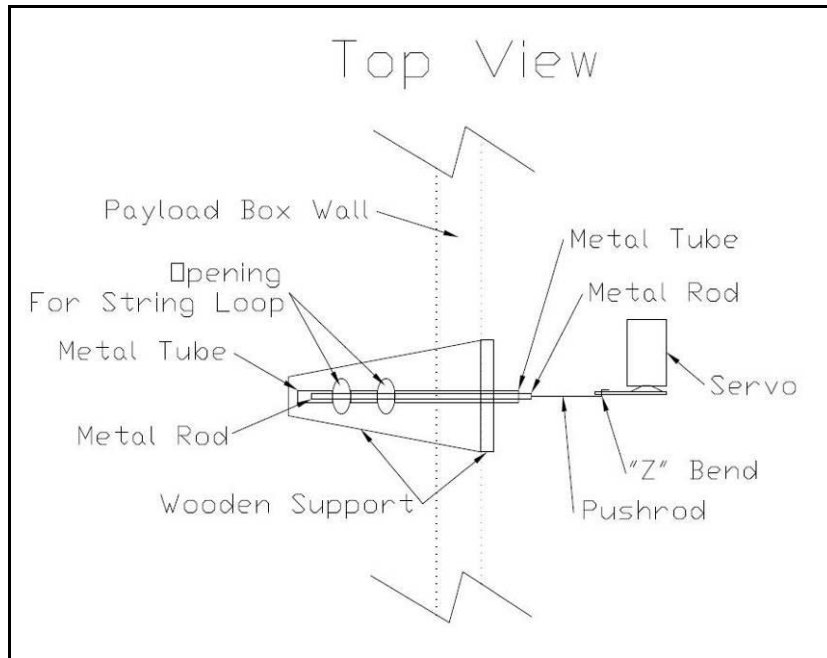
Top View Detail Drawing of Release Mechanism Design.
